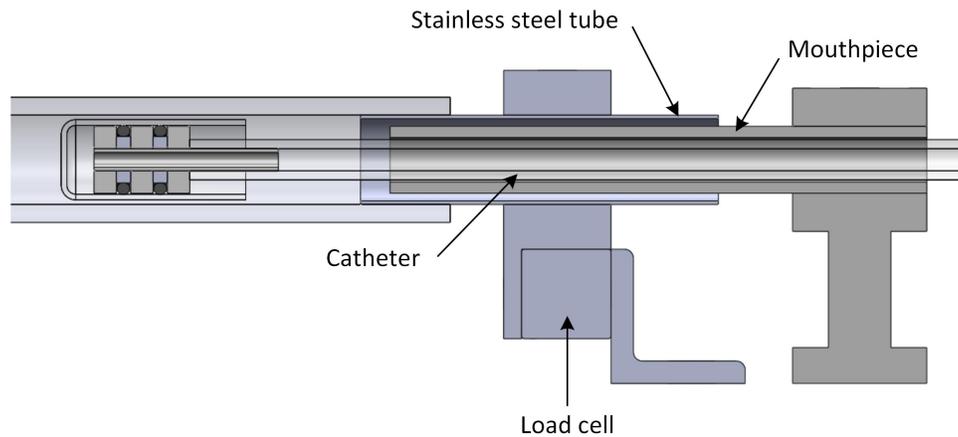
A cross-sectional view of the esophageal mock-up and mouthpiece. Note that the mouthpiece does not contact the stainless steel tube which supports the esophageal mock-up tubing.
